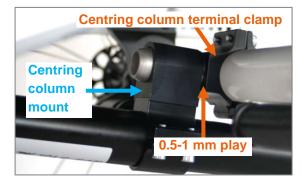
Centring column mount on the centring column, fixed frame adapter mounted and ready for operation
